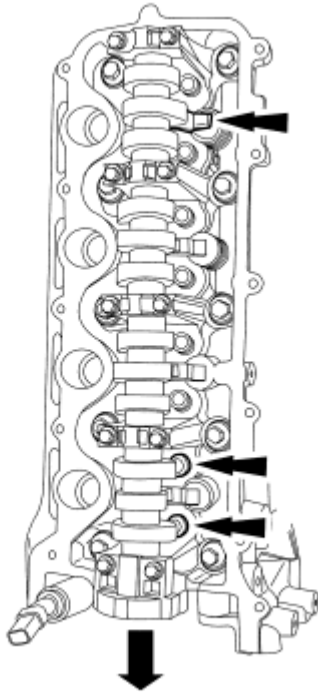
Identifying Special Tool (303-1039) For Removing/Installing Camshaft Roller Followers
